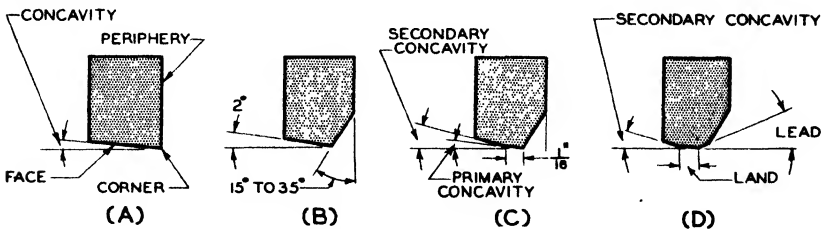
Details of Four Shapes of Milling Cutter Teeth
